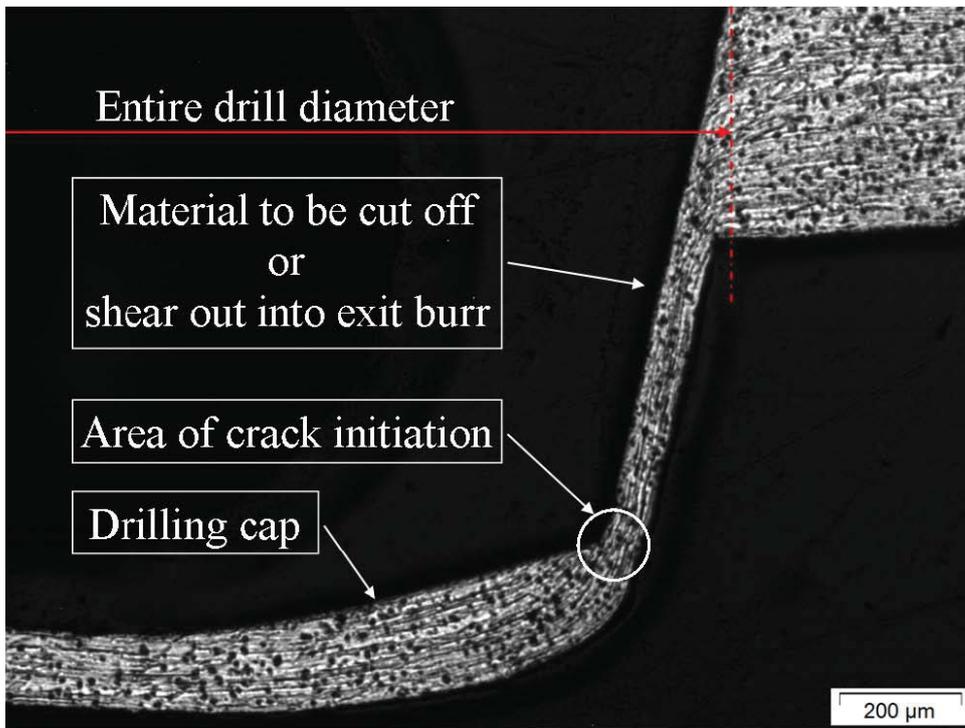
Etched cross-section view of exit burr, Drill A, zoomed on Figure 8.23.
